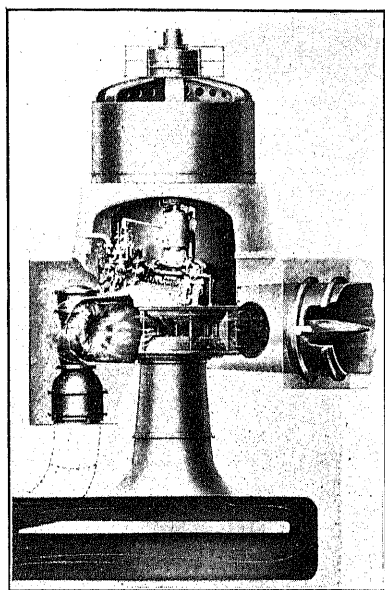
SECTIONAL VIEW OF HYDROELECTRIC UNIT, SHOWING BUTTERFLY VALVE, PRESSURE REGULATOR, HYDRAUCONE AND INTEGRAL TYPE GOVERNOR
